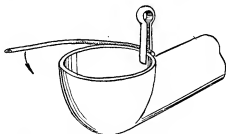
Split-pin used to clamp "bead" in position during soldering operation
